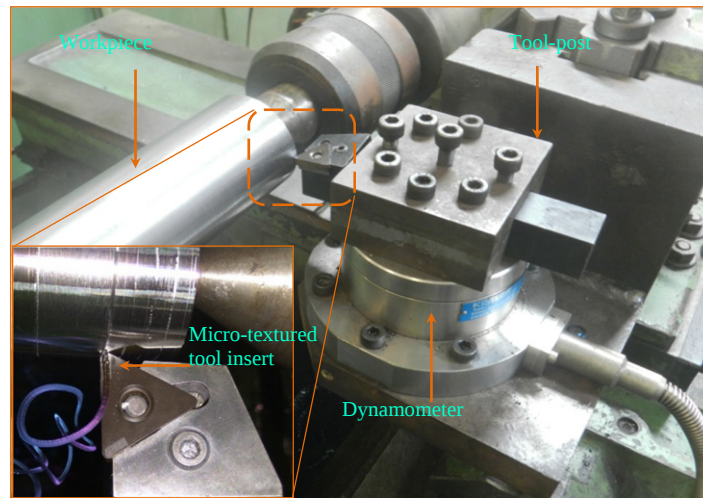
Machining experimental set-up showing dynamometer, tool post, workpiece and magnified view of micro-textured tool insert. Reproduced from Gajrani, K.K., Suresh, S., Sankar, M.R., 2018a. "Environmental friendly hard machining performance of uncoated and MoS₂ coated mechanical micro-textured tungsten carbide cutting tools". Tribology International 125, 141–155. doi:10.1016/j.triboint.2018.04.031.
